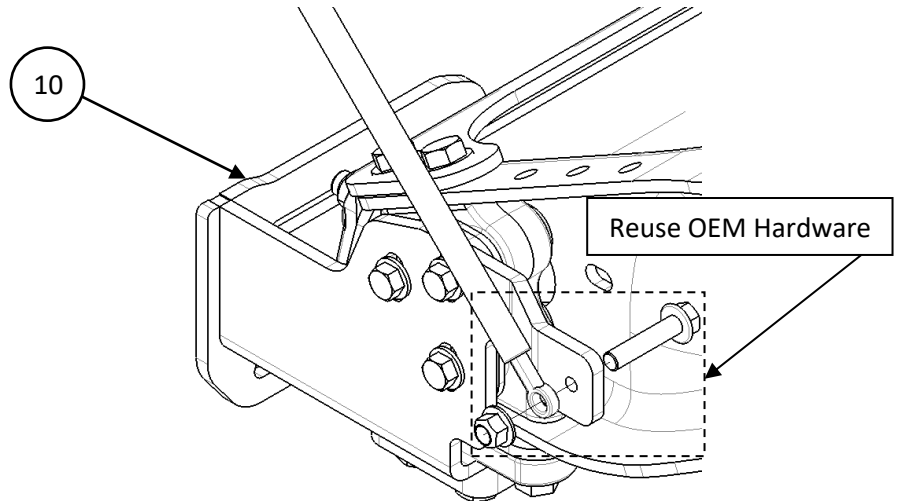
Hood Strut Reinstallation (Driver Side Shown).
